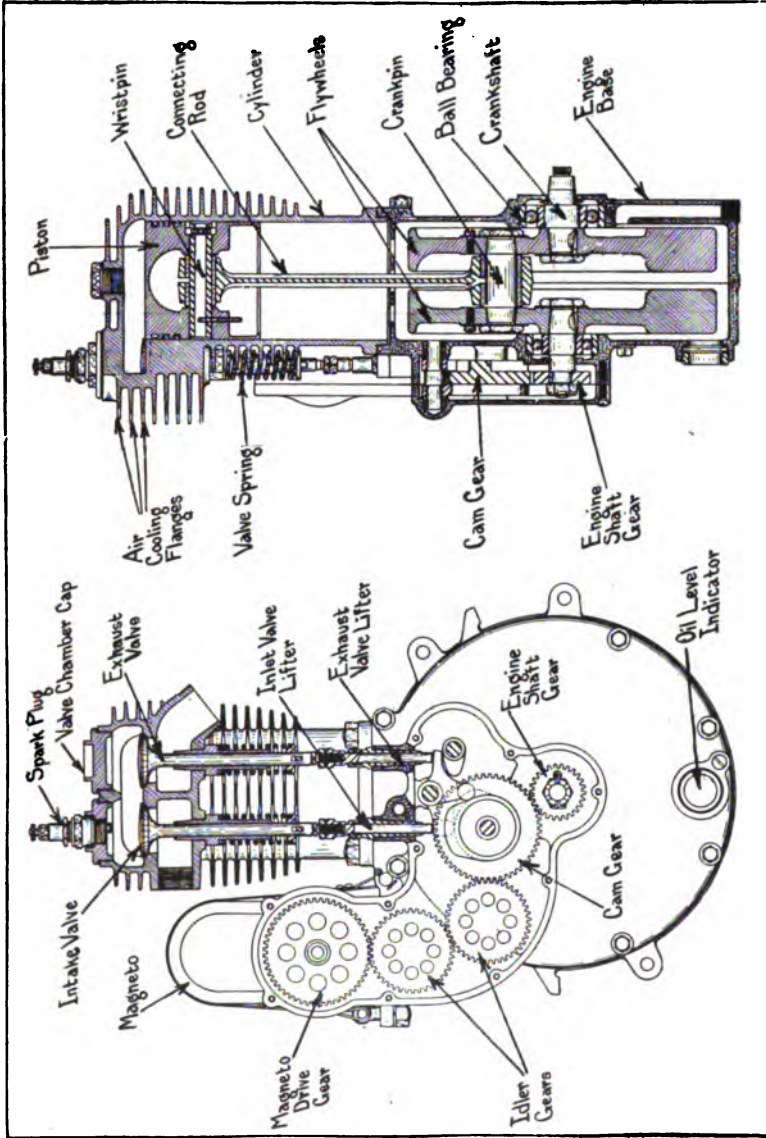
Sectional view showing arrangement of interior mechanism of the Reading Standard single cylinder motorcycle engine.
